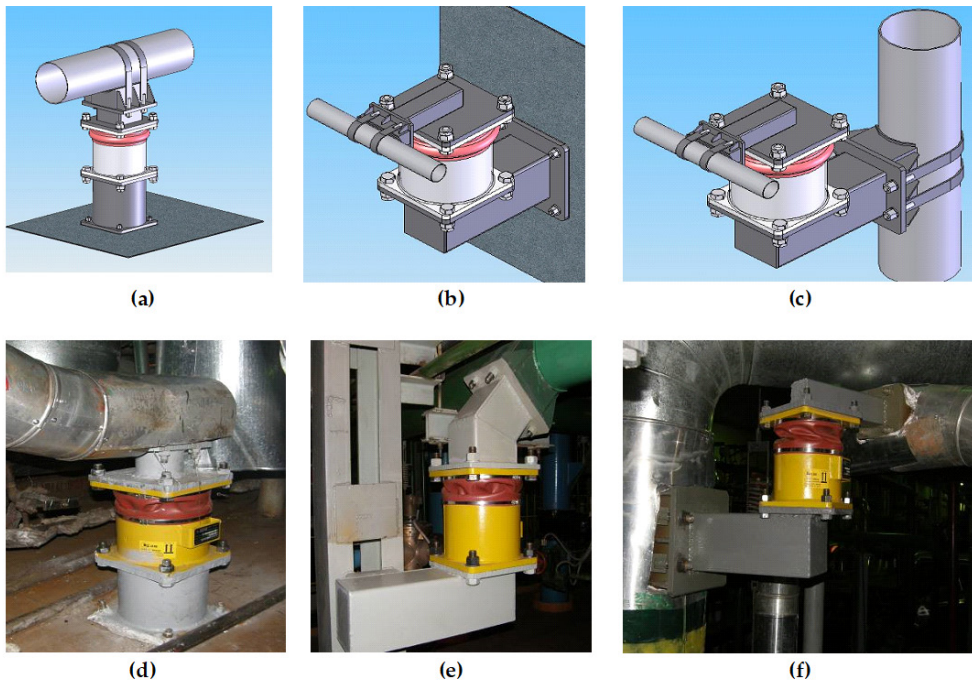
(a), (b), (c) – typical schemes of damper attachment; (d), (e), (f) – examples of damper installation on RL piping; (a), (d) – piping & floor; (b), (e) – piping & building structures; (c), (f) – piping & piping.
